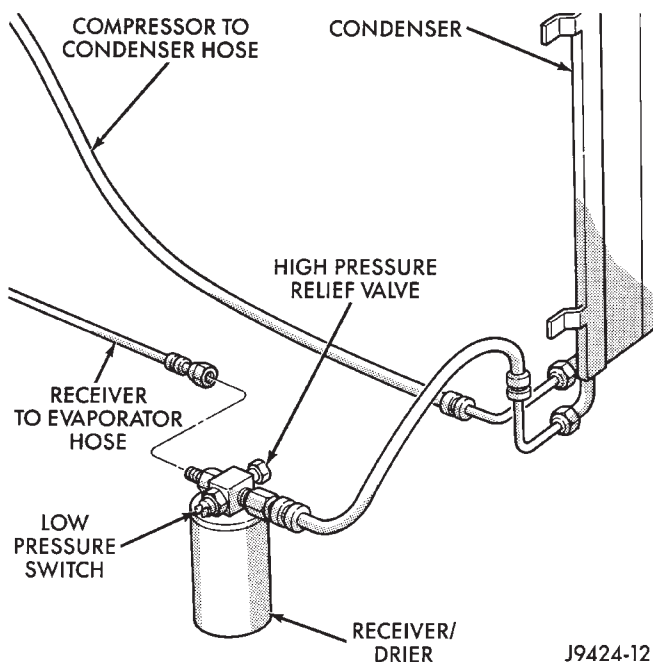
Condenser and Filter Drier—LHD 4.0L Engine
